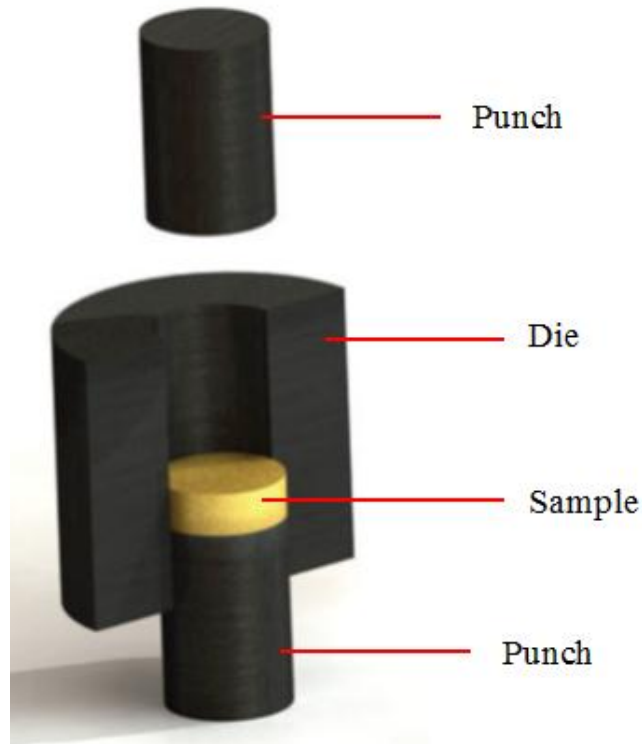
Schematic of the punches, die, and sample assembly used for SPS sintering [47].
